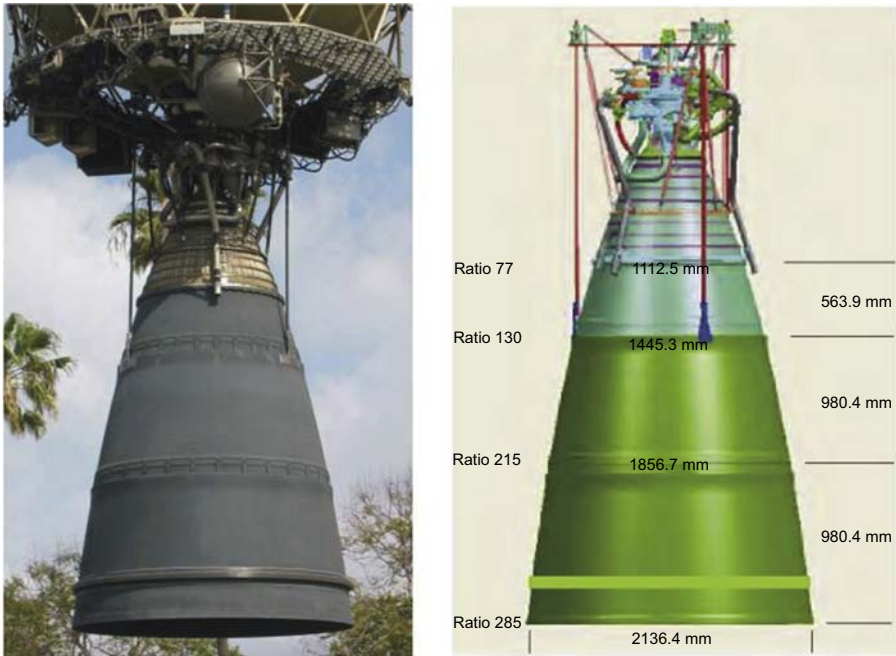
C/C composite rocket nozzle extension for Pratt & Whitney Rocketdyne's RL10B-2 engine (http://www.b14643.de/Spacerockets/Diverse/P&W_RL10_engine/index.htm).
